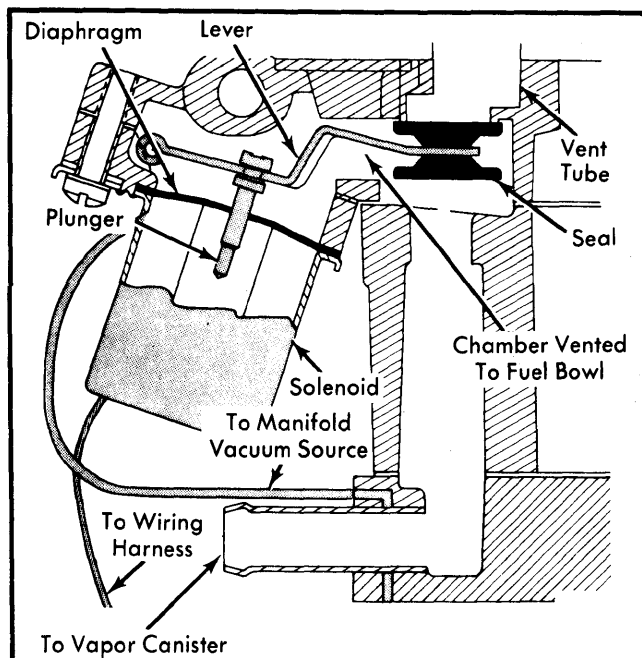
Cutaway View of Solenoid Vent Valve for Checking Vent Valve Operation
